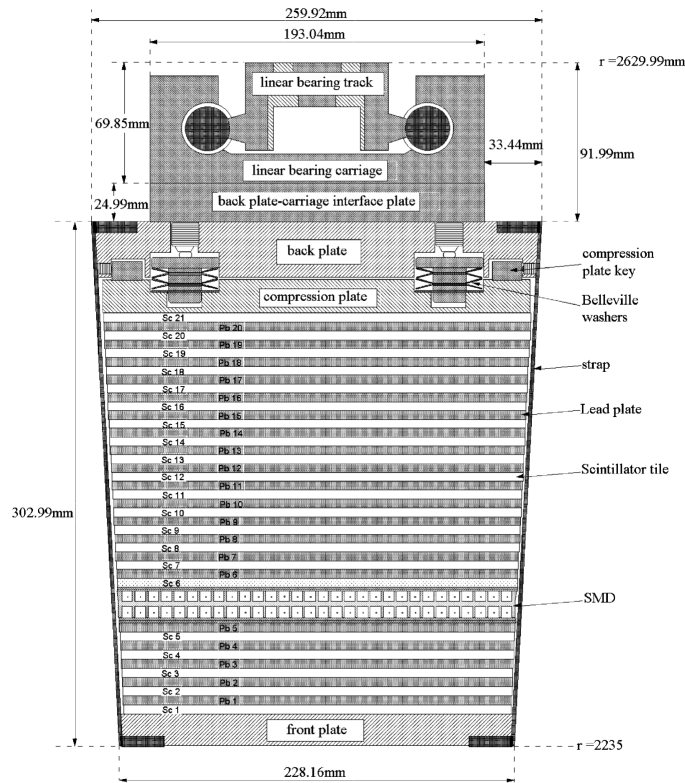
A cross-section of an individual BEMC tower, including its structural plating and mounting apparatus. Used with permission from [18].
